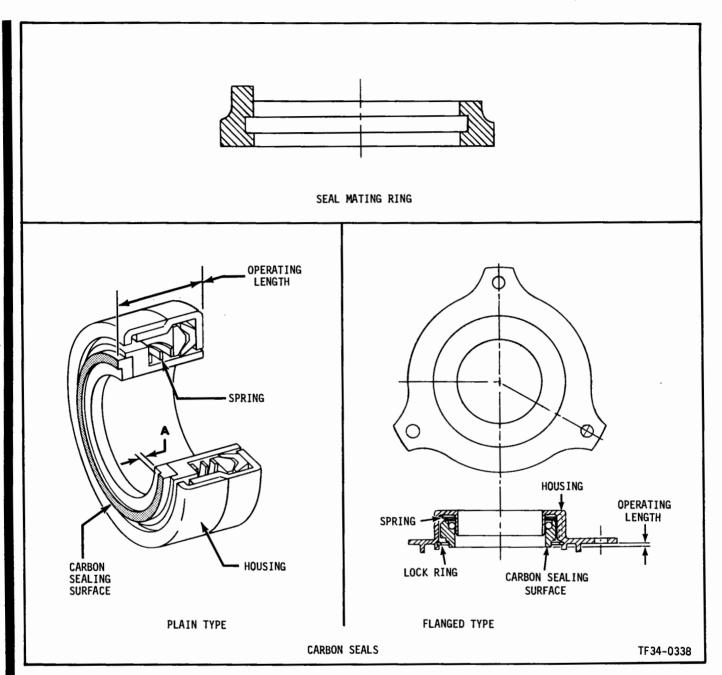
Gearbox Carbon Seal and Mating Rin	ing Inspection
